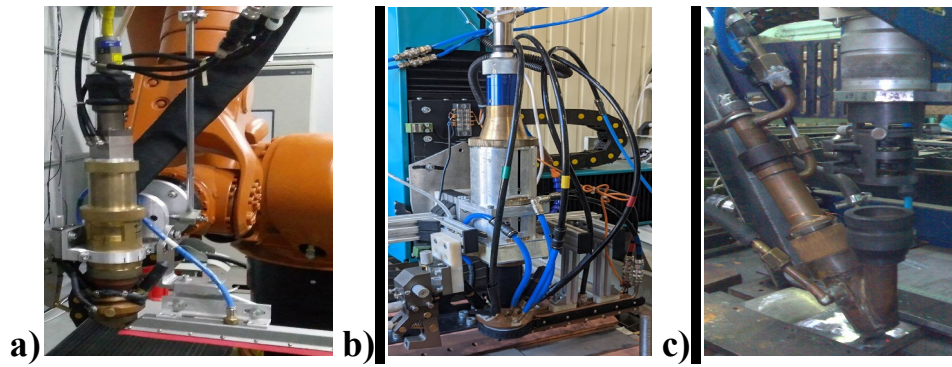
Examples of heads for hybrid welding, developed in PWI [3]: a) – laser-microplasma; b) – laser-plasma; c) – laser-TIG.
